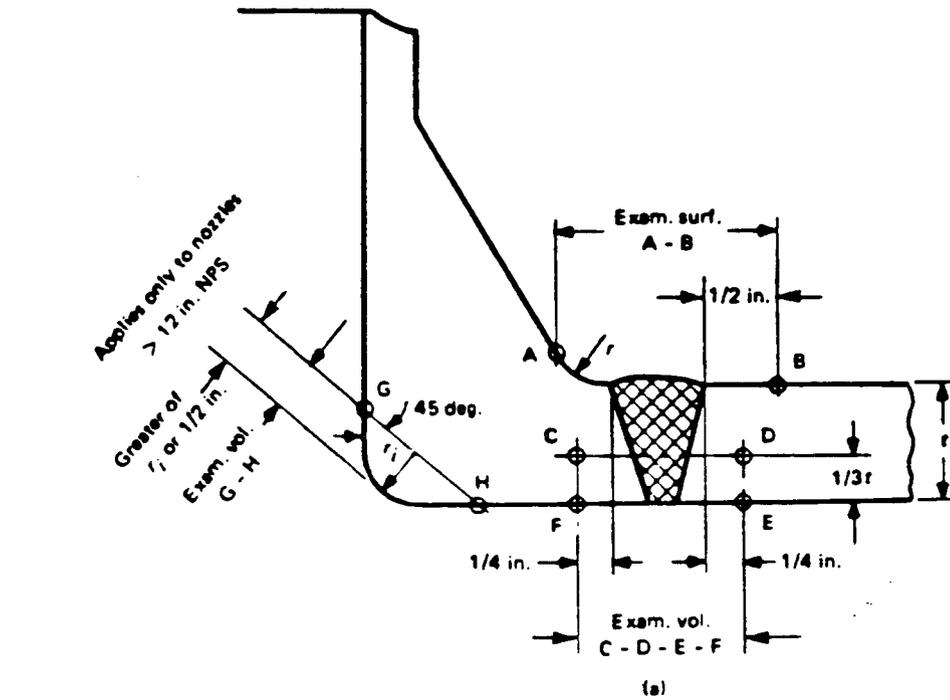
TYPICAL TUBESHEET-TO-SHELL CIRCUMFERENTIAL WELDS
